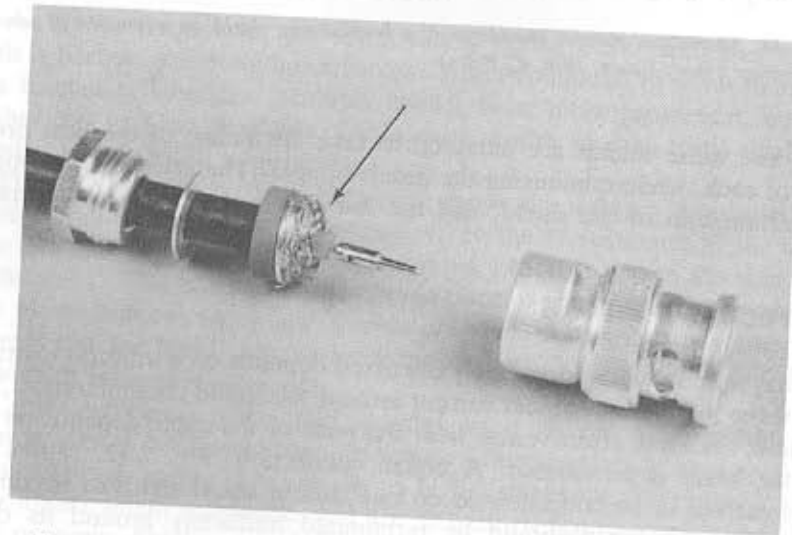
Disassembled BNC connector showing a 360° contact to shield
